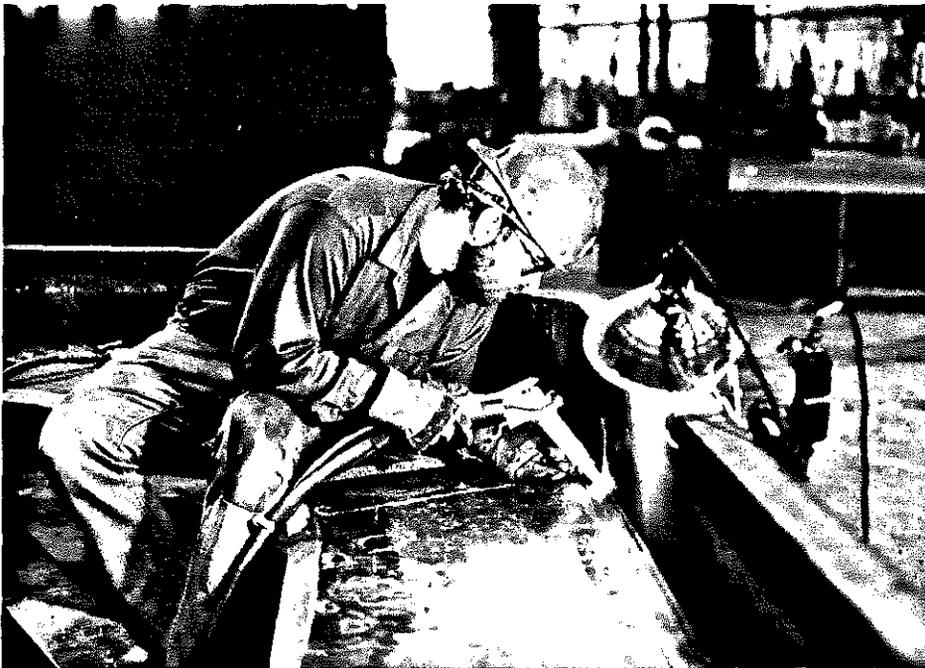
Manual SAW Used in a Short Weld Repair (Note Transducer Assembly on Backside of the Flange on the Right Corner of the Photograph).
